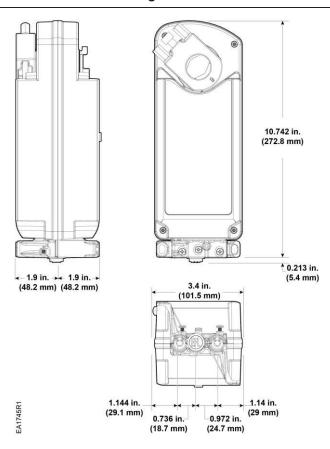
Dimensions of the OpenAir GVD/GKD Actuator in Inches (Millimeters).
